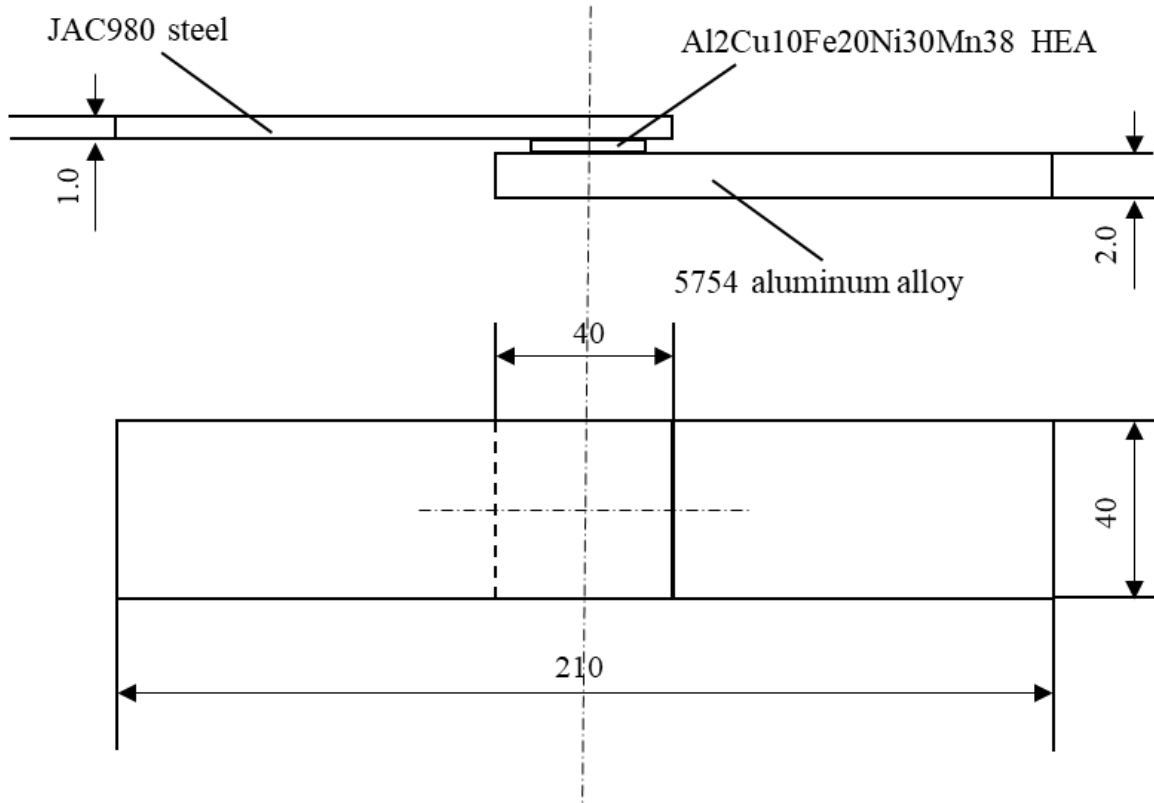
Geometry and dimensions of specimens for welding (not to scale, dimensions in mm)
